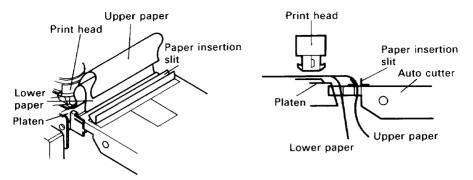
Insertion of paper in the auto cutter (When using paper copying)
